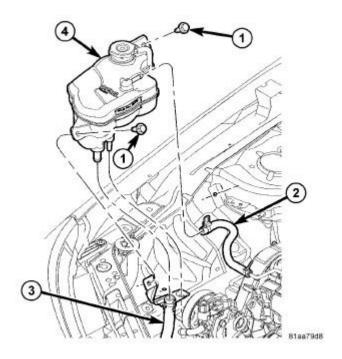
COOLANT RECOVERY CONTAINER - PRESSURE SYSTEM Courtesy of CHRYSLER LLC
